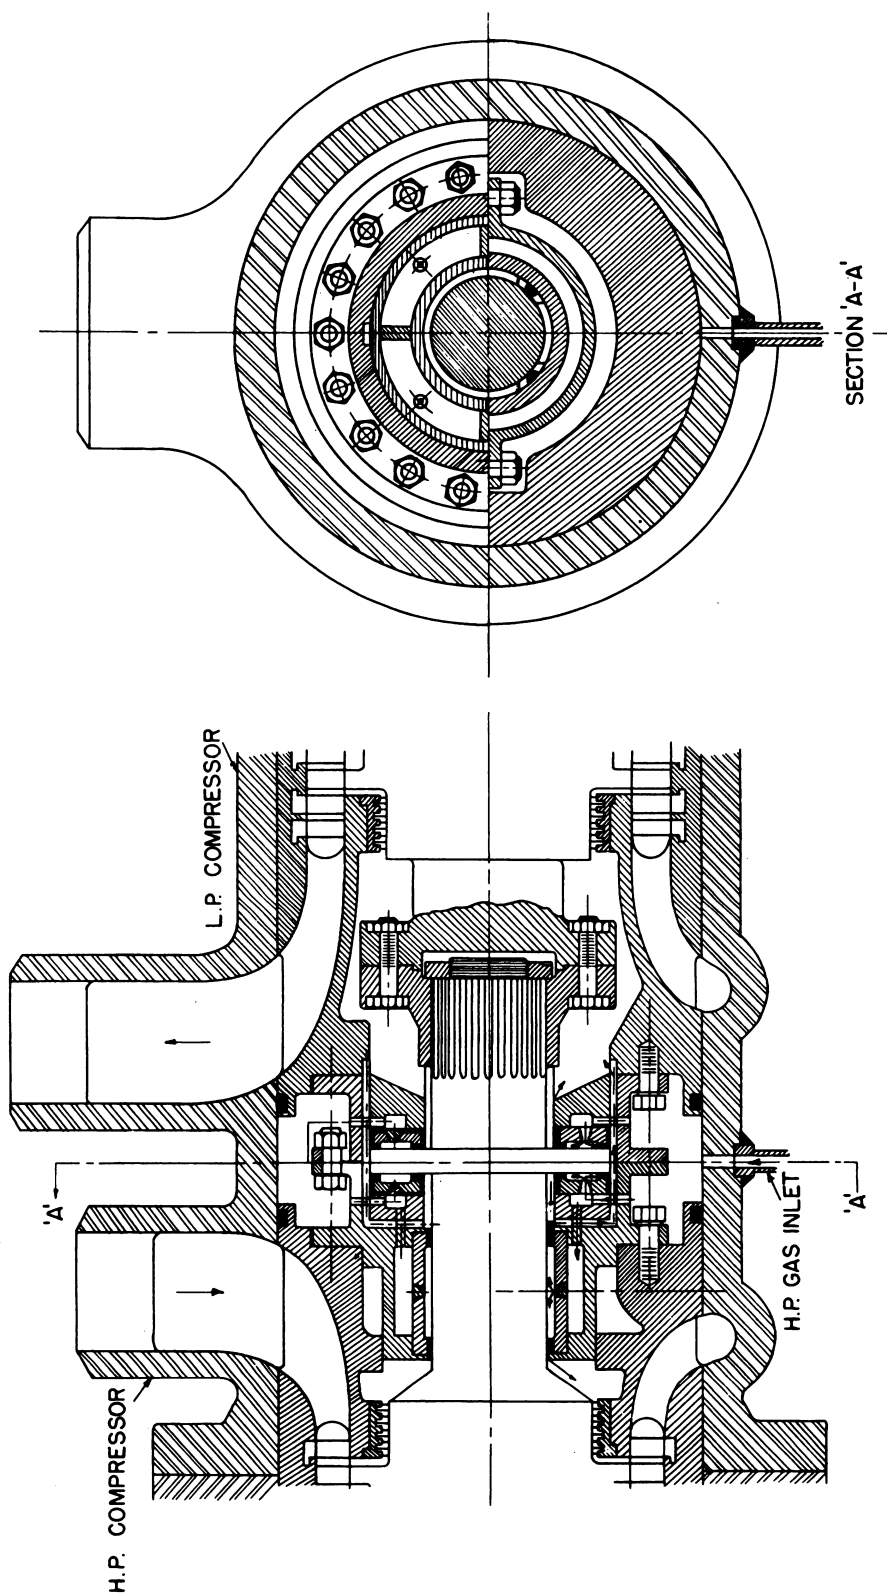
Gas Bearing for High-pressure Helium Turbine. Reprinted from NP-3683, Feb. 15, 1952.
